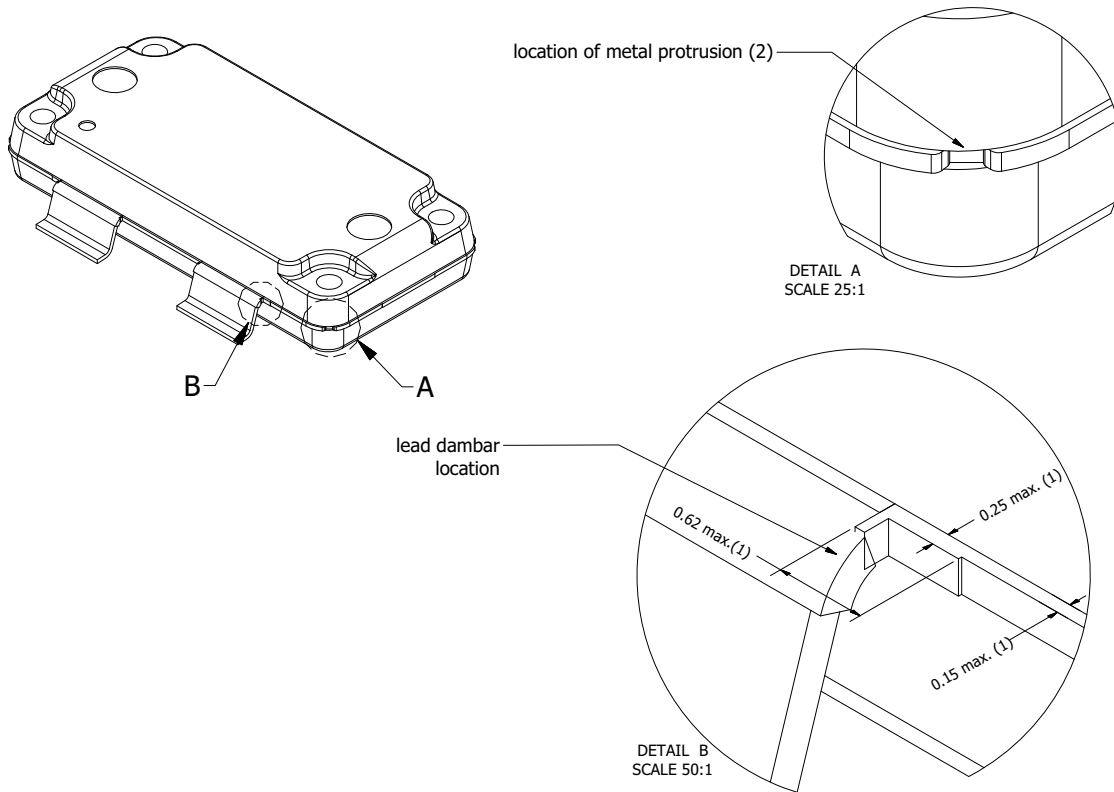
Package outline OMP-780-4G-1 (sheet 1 of 2)
